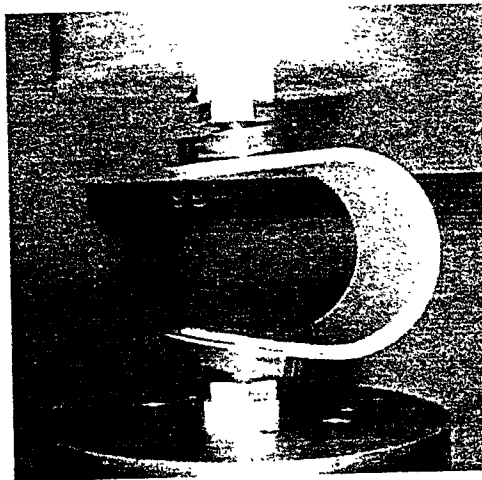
Leaf Spring Prototype Being Deformed in MTS Testing Machine.
